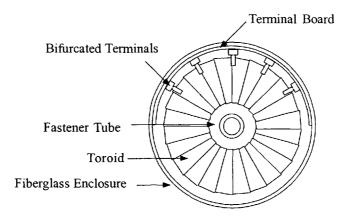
Terminal Boards, Bonded to the Wall Round Cup.
